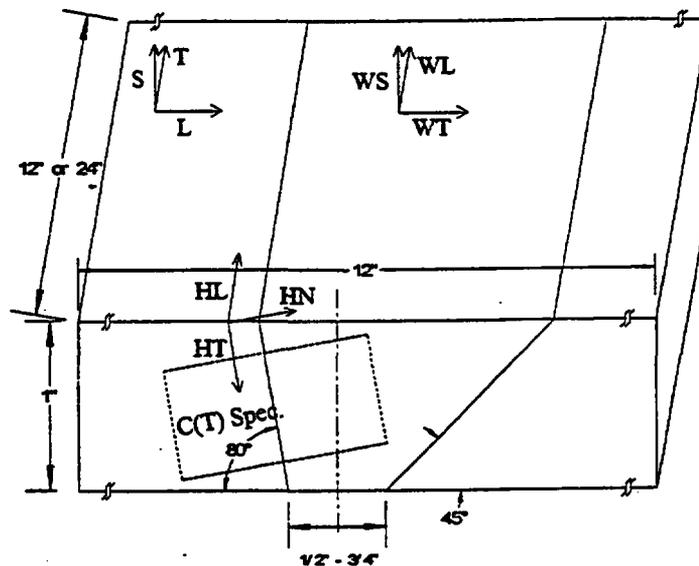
Weld coupon geometry and coordinate system. Taken from Reference 4.
